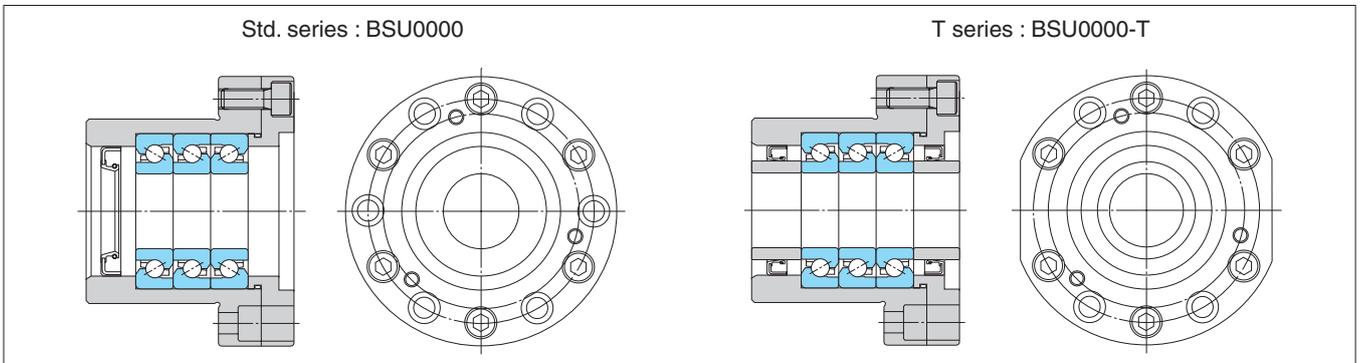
3 Series and structures of support bearing units for precision ball screws
